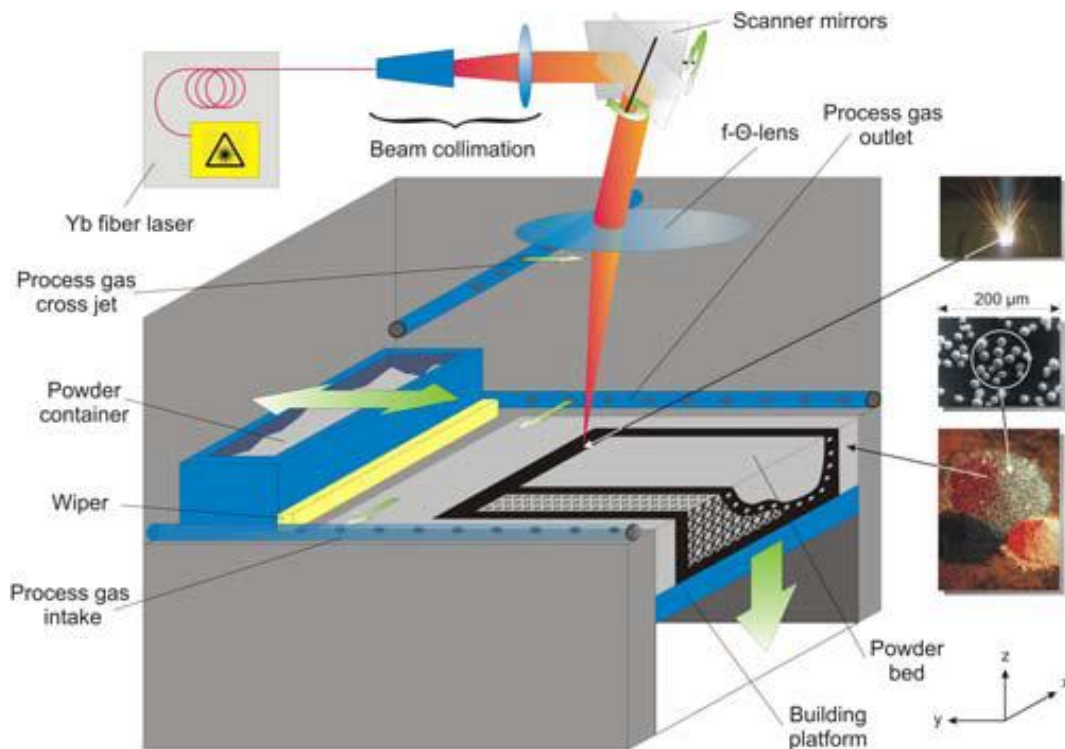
Cross section machined by laser melting technique (Rehme, 2009).
